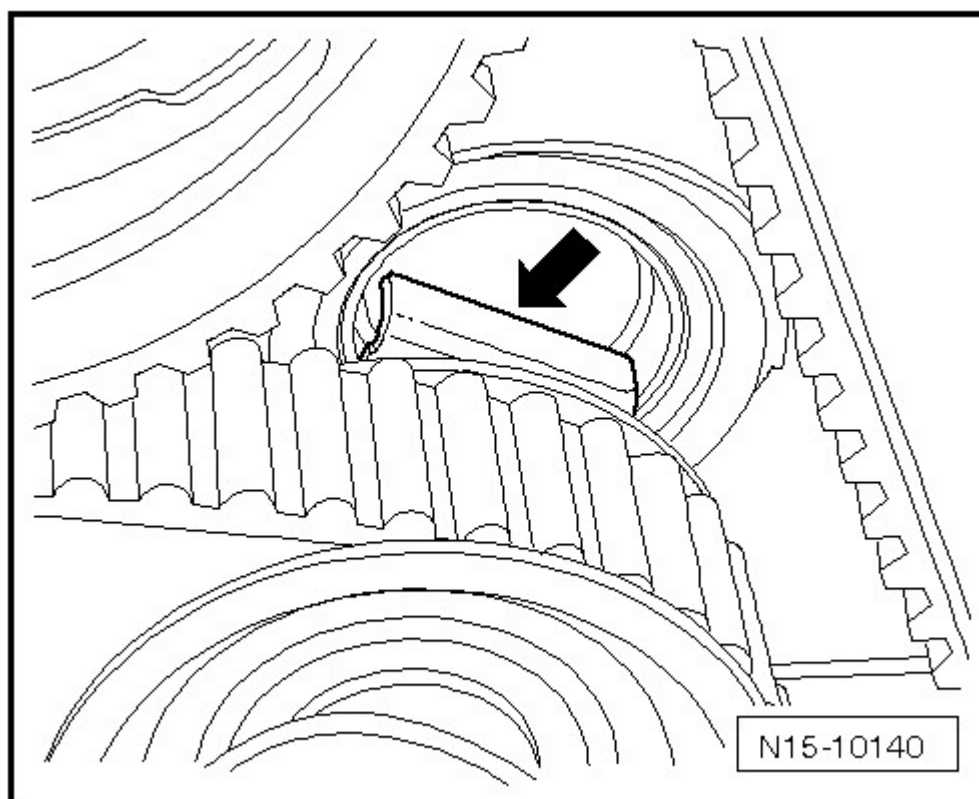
Identifying Tensioning Roller Is Properly Seated In Cylinder Head
